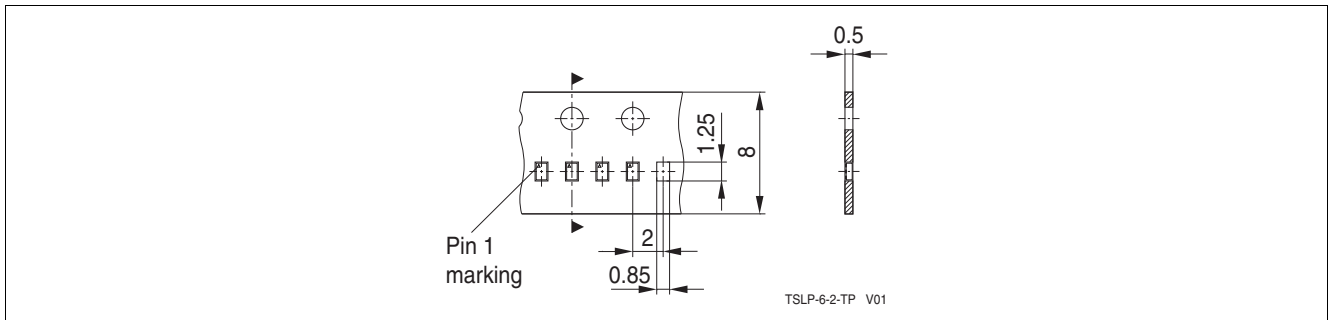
Tape & Reel Dimensions (reel diameter 180 mm, pieces/reel 15000)
